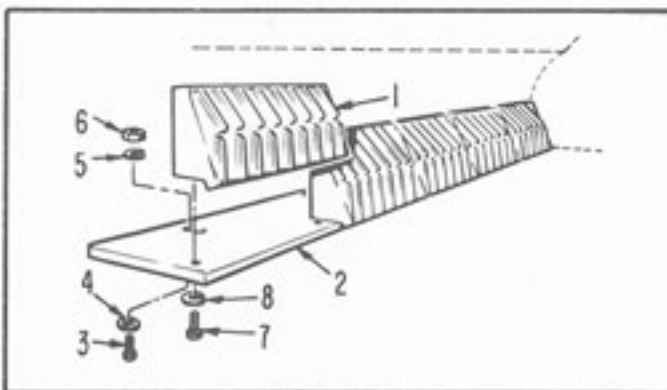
8116 - SUPER CUTTER BAR ASSEMBLY
